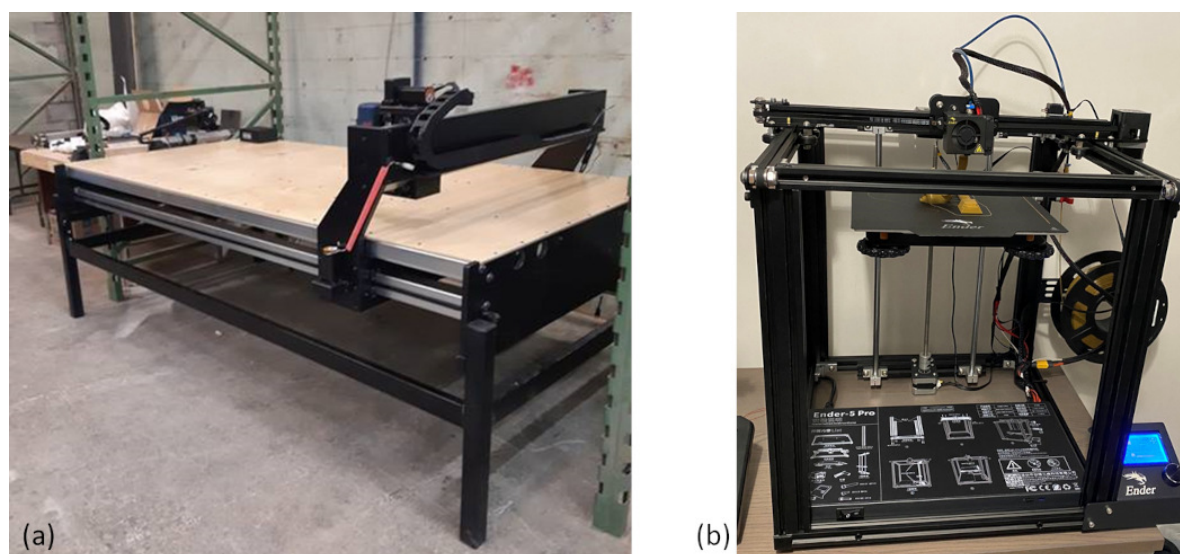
CNC machines: (a) Drilling router. (b) 3D printer.
